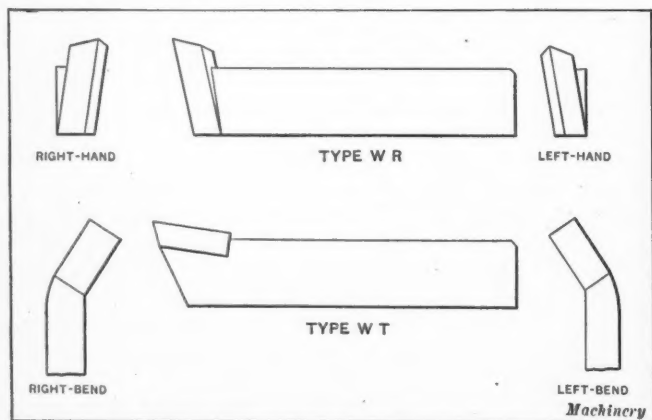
Welded Lathe Tools made by Ready Tool Co.
